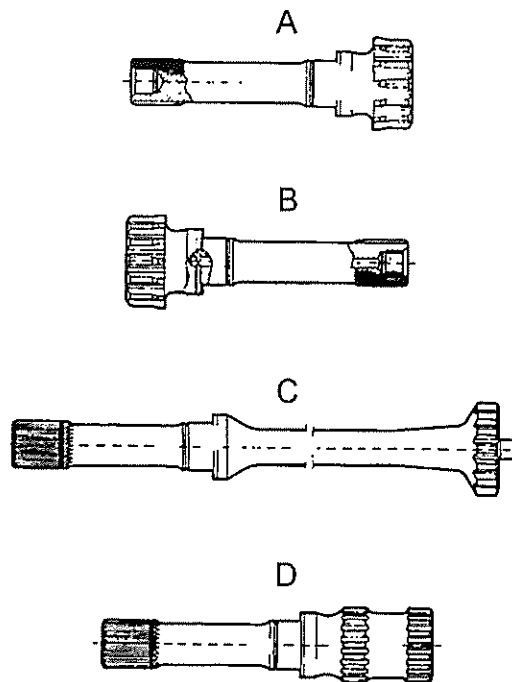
All Wheel Drive and Differential Lock Quill Shafts
